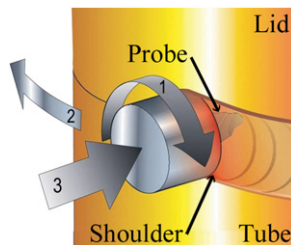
Illustration of the friction stir welding process to seal copper canisters.
